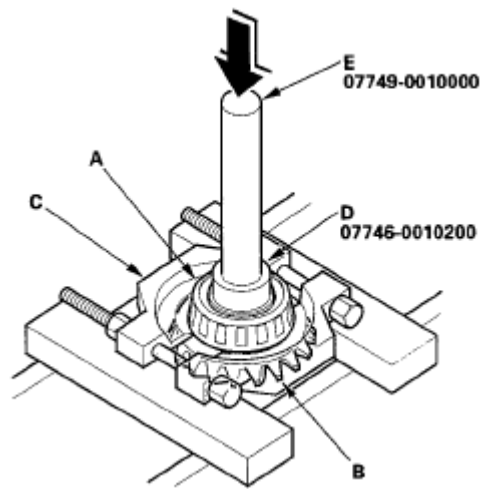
Identifying Tapered Roller Bearing, Transfer Drive Gear, Bearing Separator And Driver
